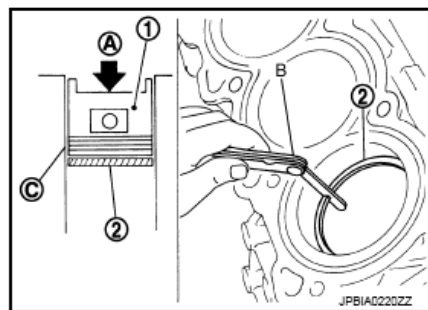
Measuring Piston Ring End Gap Using Feeler Gauge
